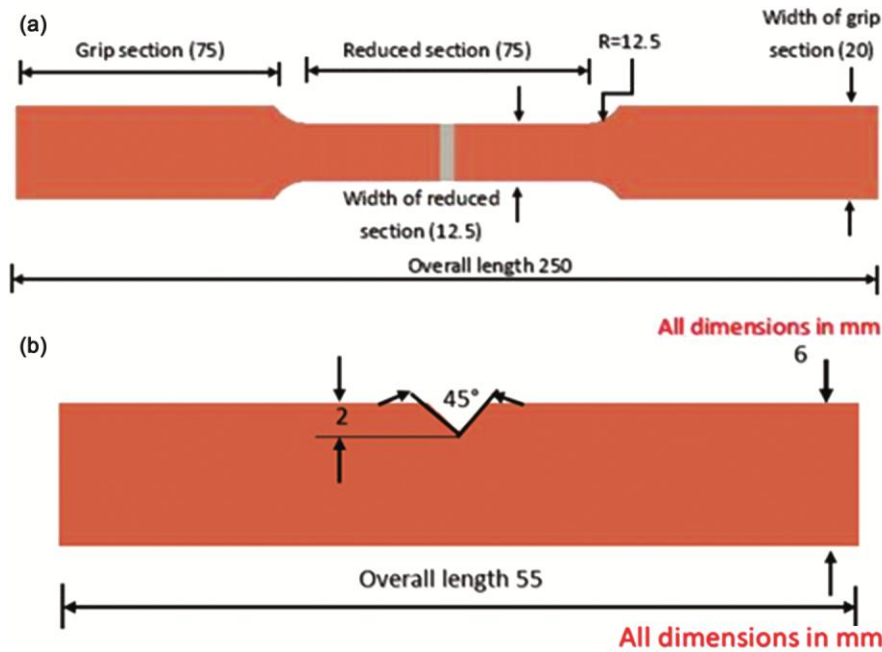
Detail drawing of specimen prepared for (a) Tensile testing and (b) Impact testing.
